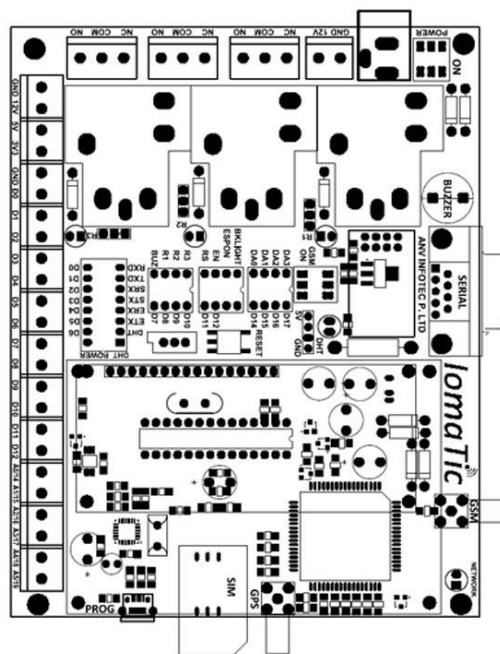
(A): Proposed IoT Development Board PCB Layout
